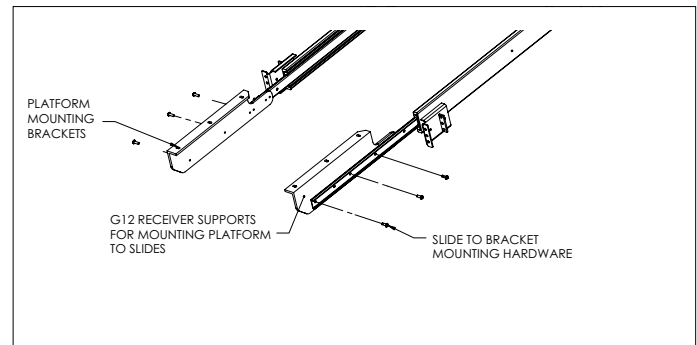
Figure B. The platform mounting brackets are threaded so washers and nuts will not need to be locked.
